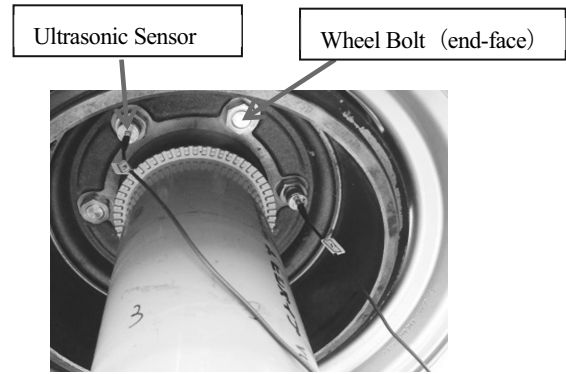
Ultrasonic sensors and end-faces of wheel bolts
